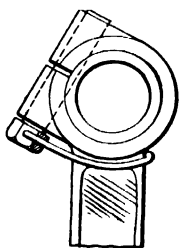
Method for Holding Wrist Pin in Connecting rod.
